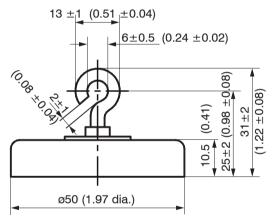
Magnetic holder MH1 - WDS, dimensions in mm (inches)
